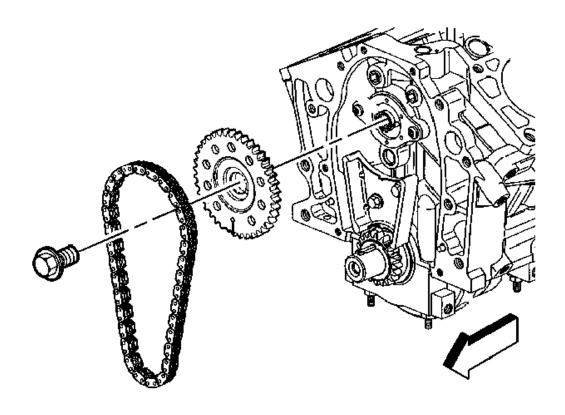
View Of Timing Chain & Camshaft Sprocket Courtesy of GENERAL MOTORS CORP.
